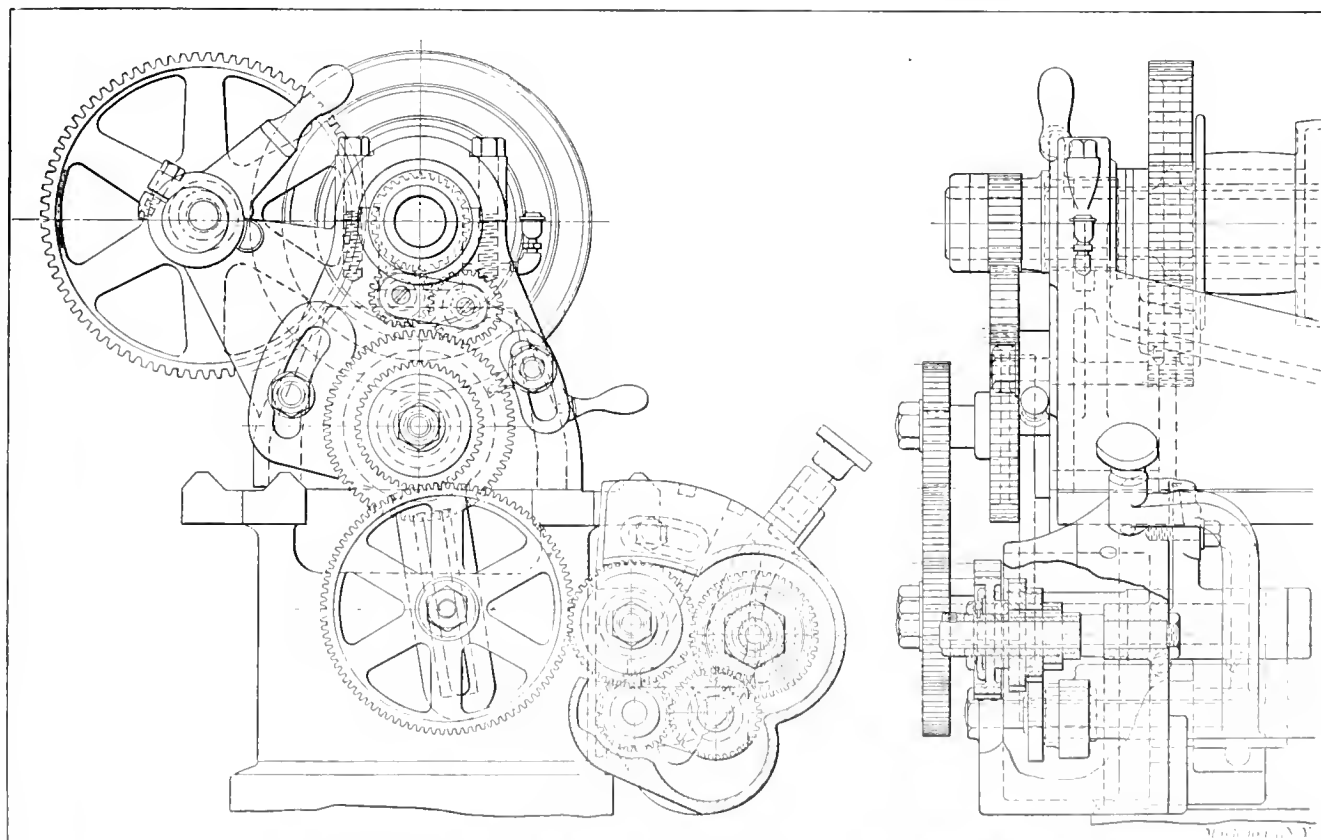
Design of Feed Box and Gearing, Milwaukee Machine Tool Co.'s 16-inch Lathe
